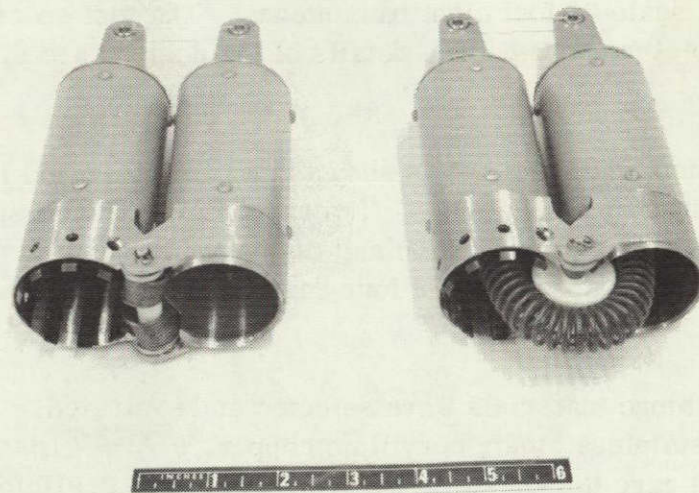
Test Specimen — Tension and Torsion Spring Hinge — Packaged
